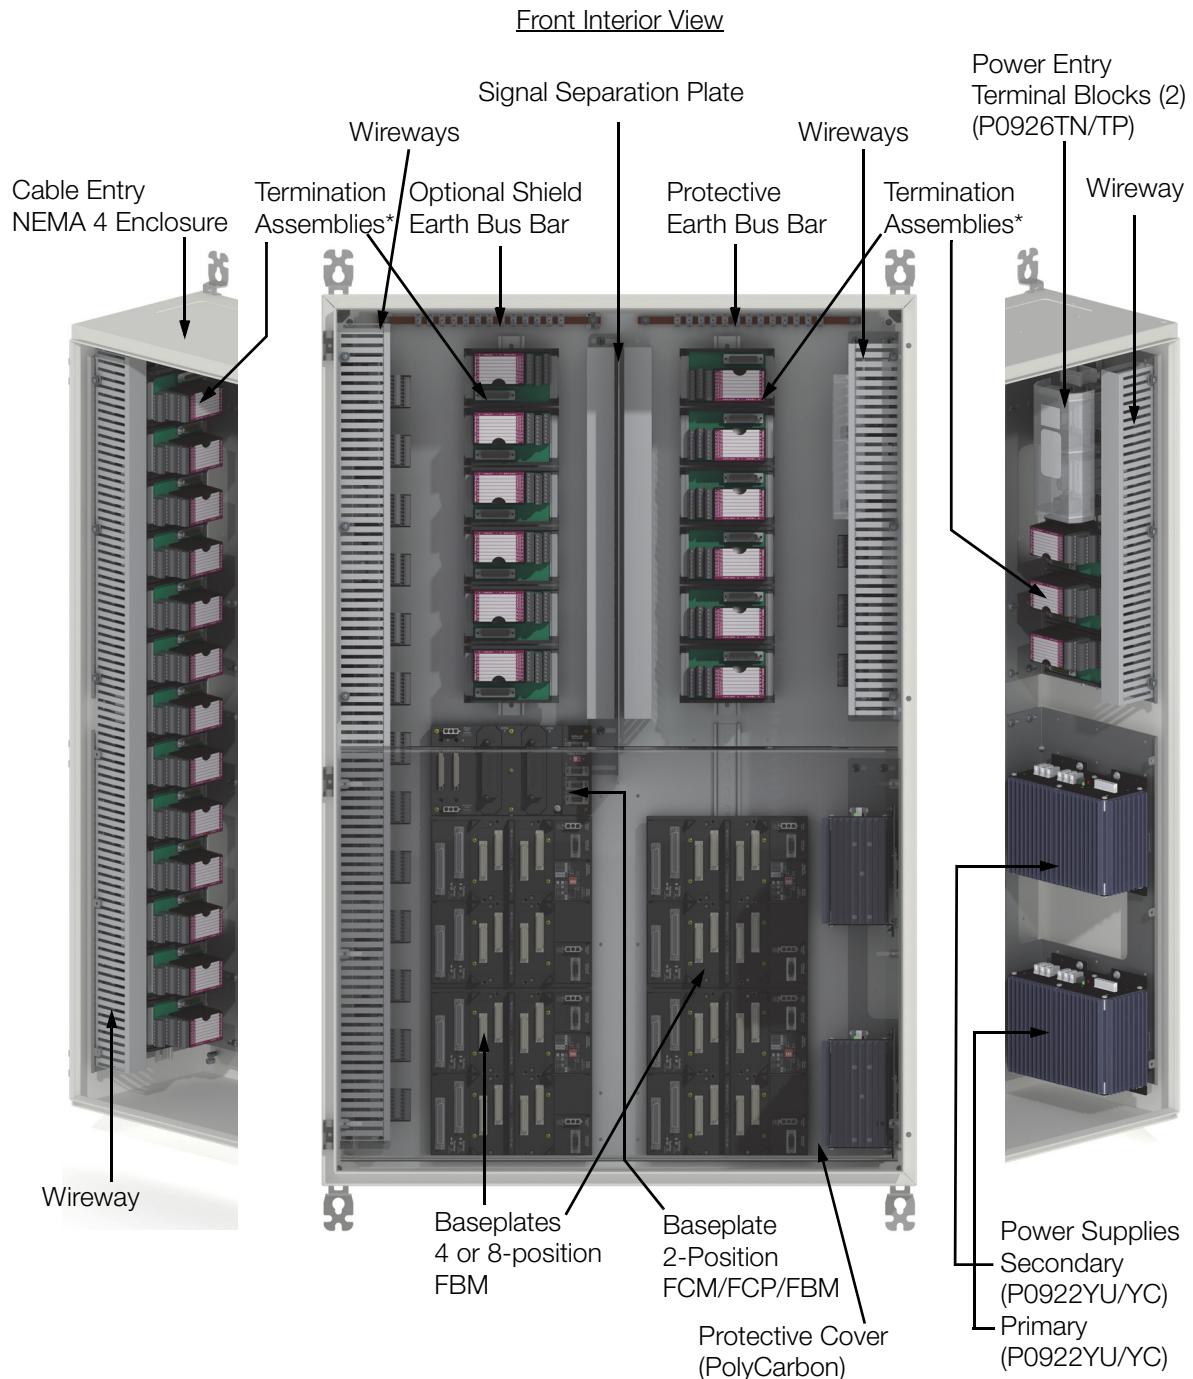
K06 Enclosure, Top Cable Entry, Front View
